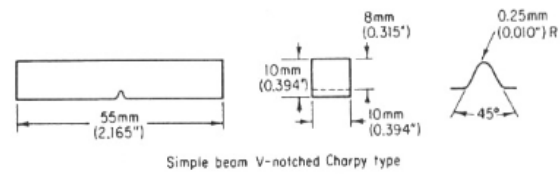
The dimension of impact testing standard (JIS Z 2242)
